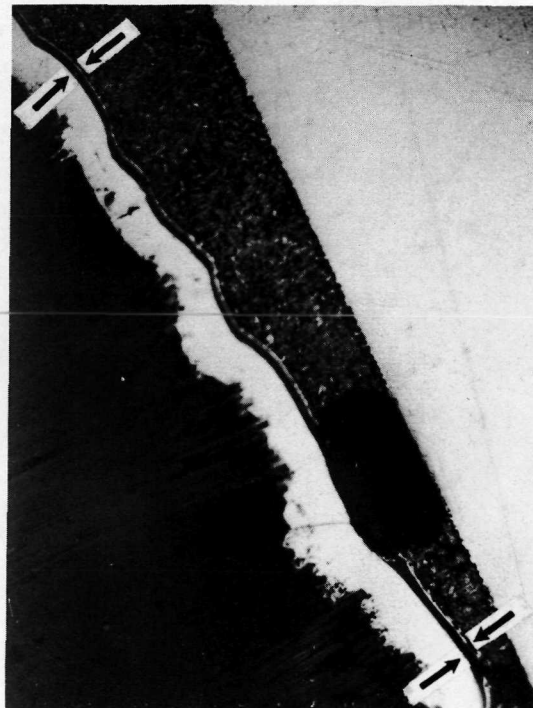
Complete solder separation from the hole plating of a gold-over-plated copper (with brightener additives) plated-through-hole.
